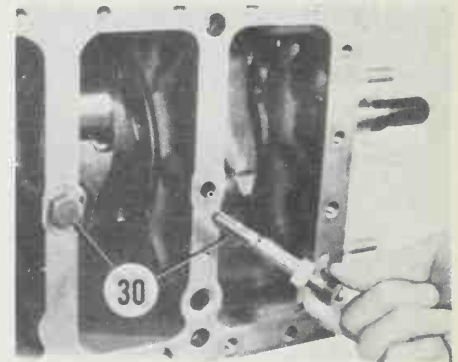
View showing location of locating screw (30) which secures bearing carrier to block. Model S2200-B is also equipped with screws in side of block that secure bearing carrier.
